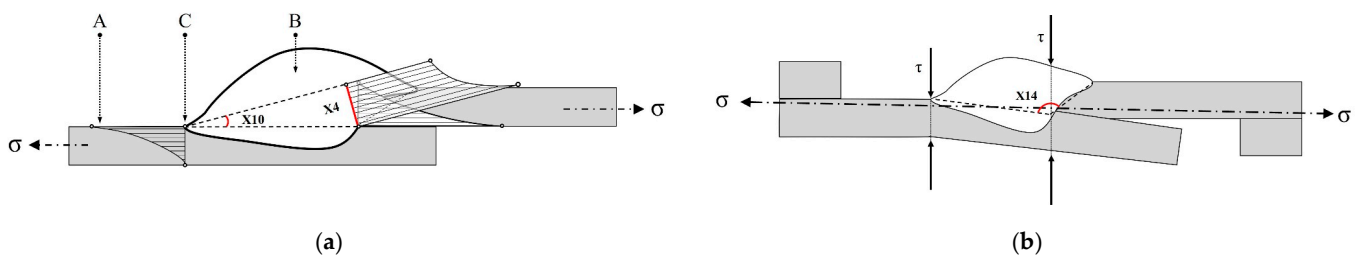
Stress distribution of lap welds during loading. (a) Stress distribution field and (b) bending morphology at weld toe and root stress concentration.
